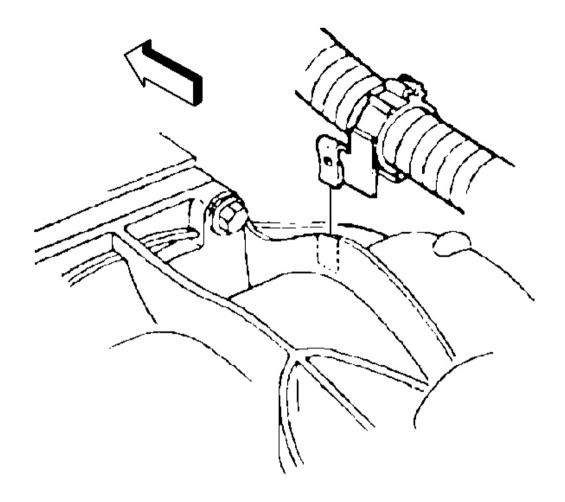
Wiring Harness Retainer & Clip Courtesy of GENERAL MOTORS CORP.
